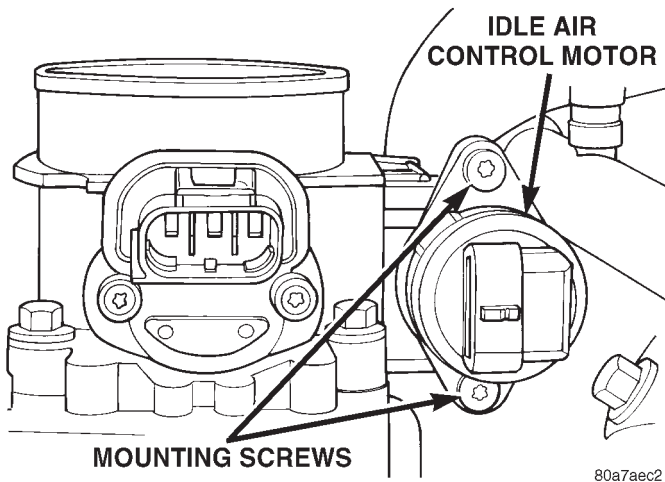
Mounting Bolts (Screws)—IAC Motor—4.0L Engine
